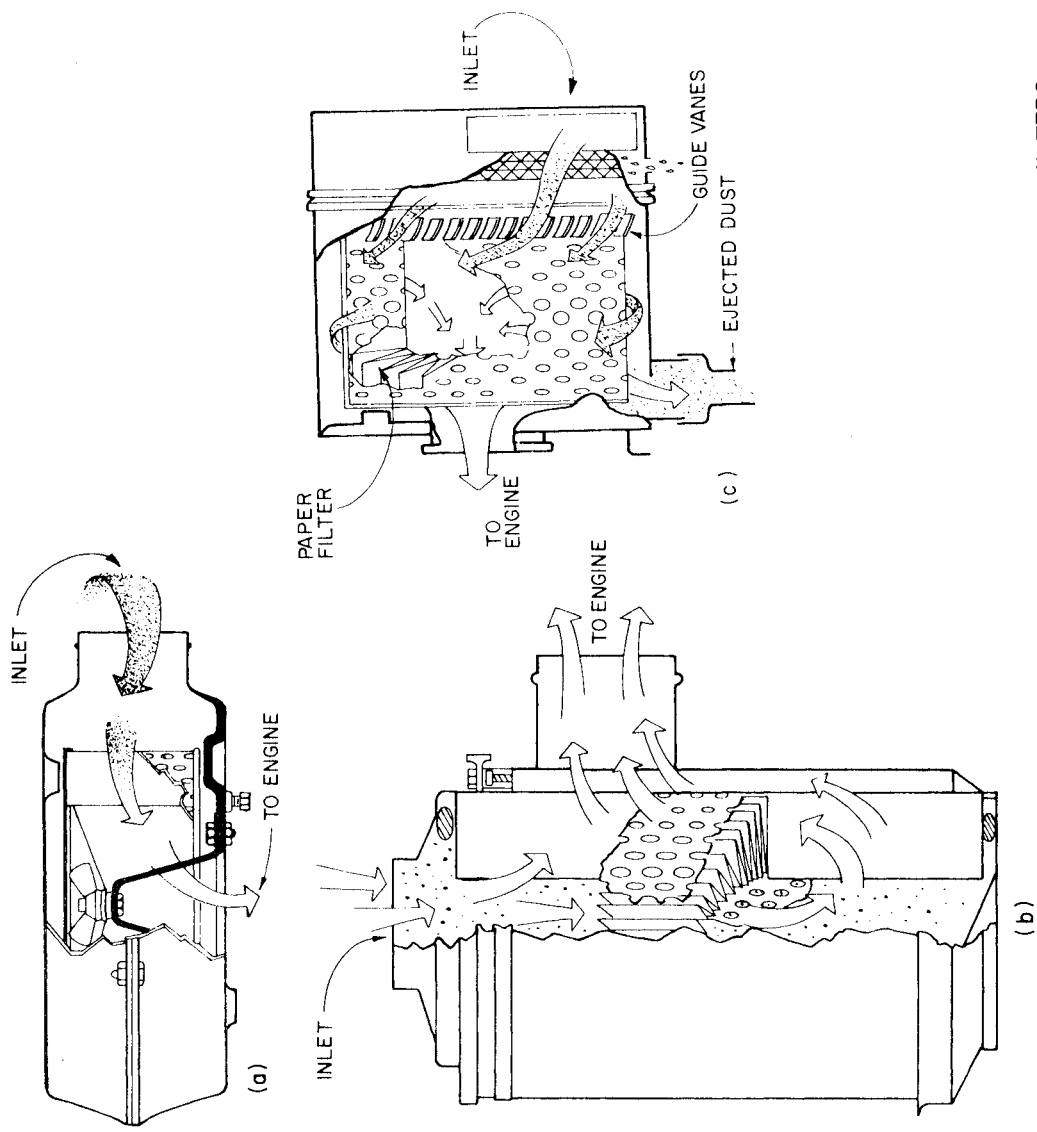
CUTAWAY VIEWS OF THREE DRY TYPE INTAKE FILTERS
